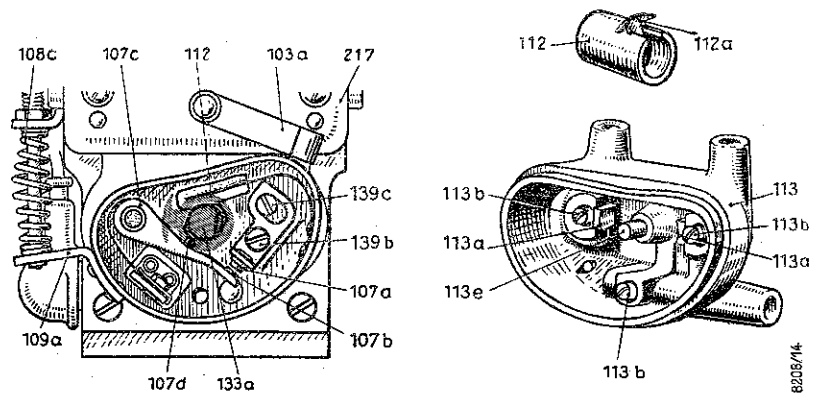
Dynamo-Coil-Ignition-Unit B 245, distributor disc removed
